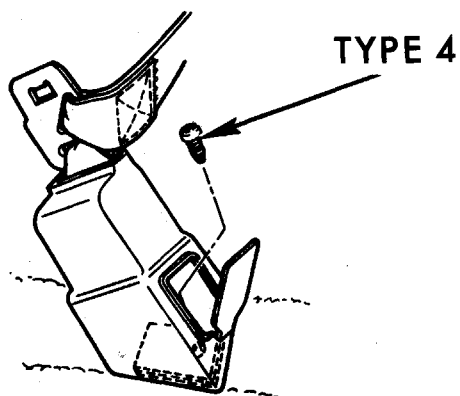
Front Seat Lap and Shoulder Belt Anchor Bolts - "A,F,H and X" Styles
